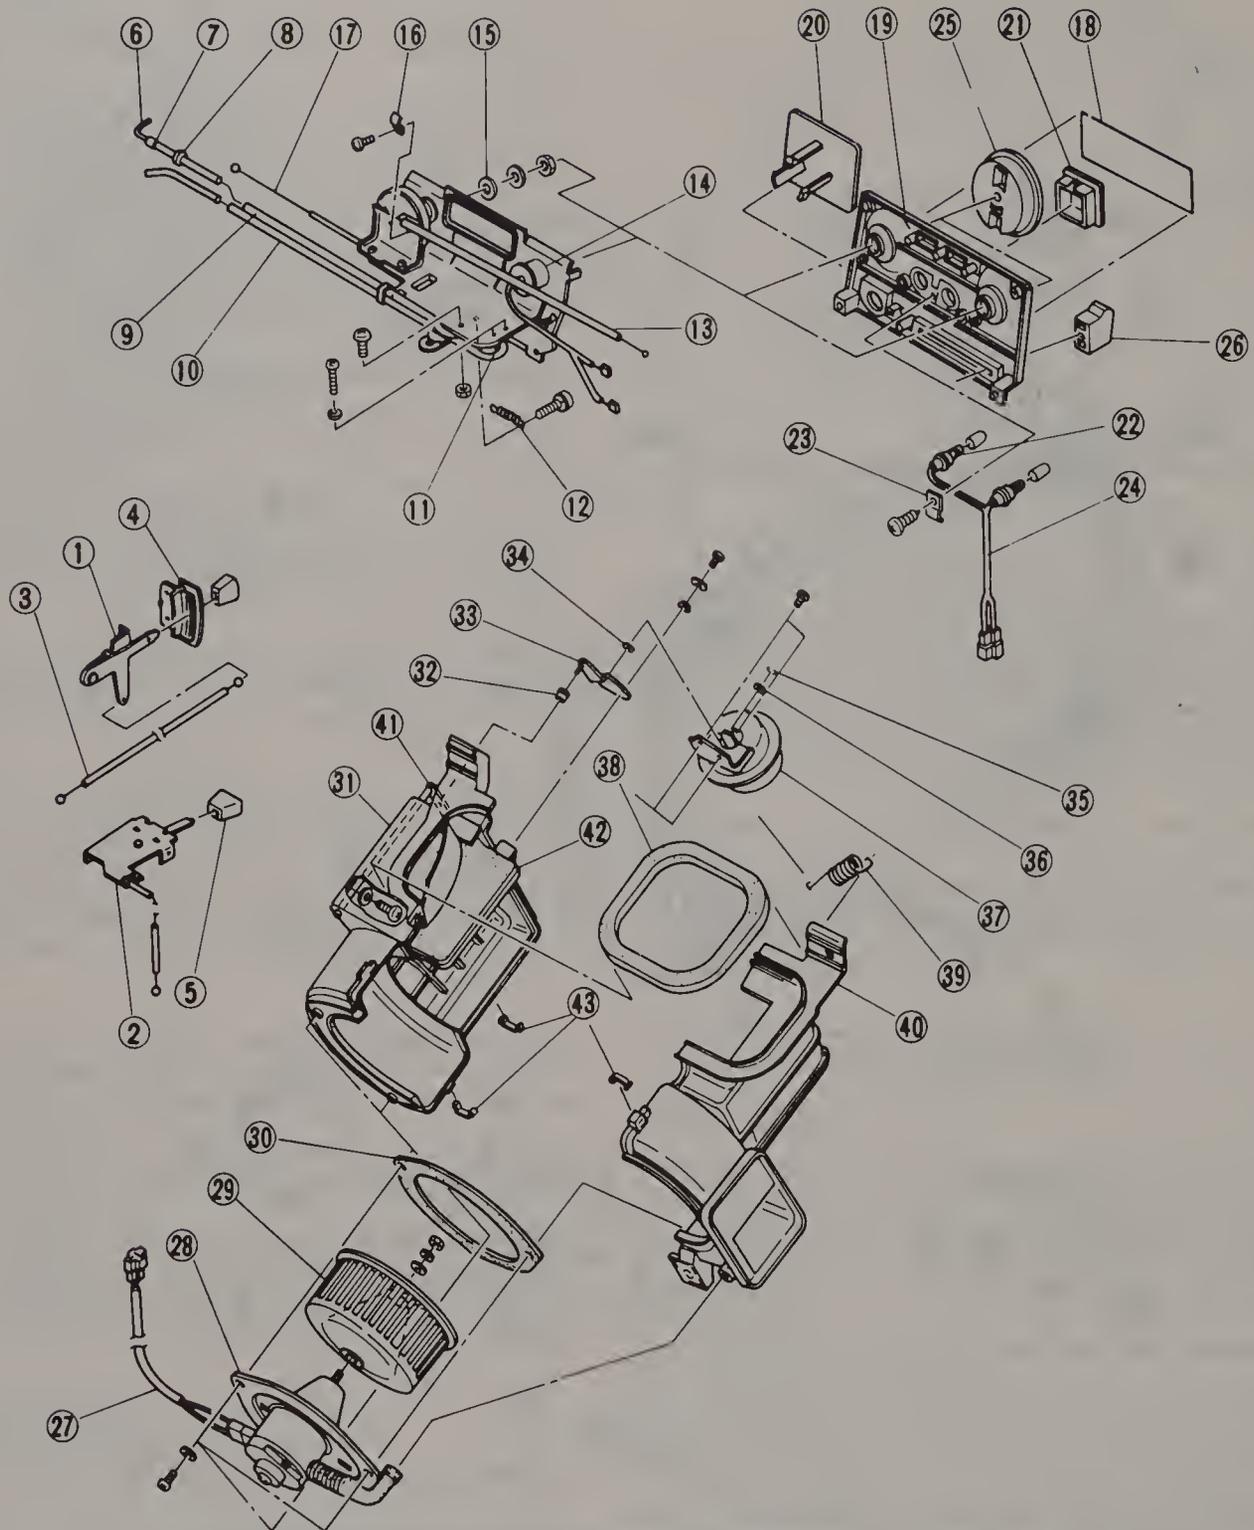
Heater control and blower components – exploded view (Sec 7)
